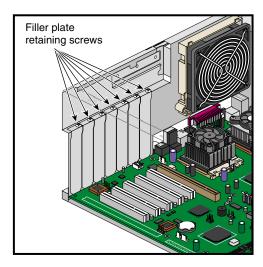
Location of the Retaining Screw for the Expansion Slot Filler Plate
